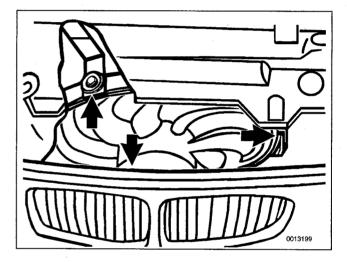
Version 1 auxiliary fan mounting screws (arrows).
